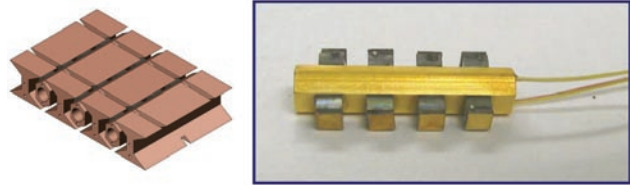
Fractional Pb/TSAGS TGM Isometric Drawing and Hot-Side Subassembly (Substrate with Interior Cartridge Heater and TE Elements)
